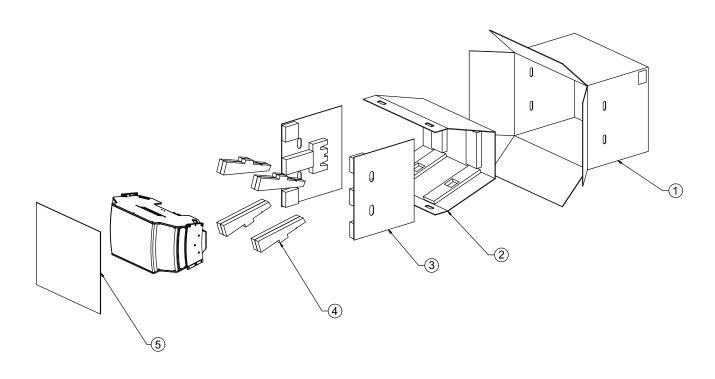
RoomMatch Array Module Loudspeakers Packaging View
